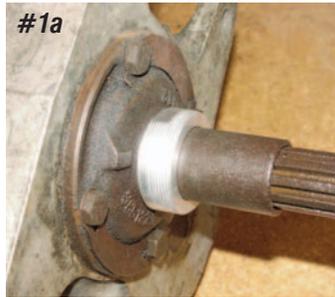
& 1b: The old universal style release bearing fit onto the stock front bearing retainer. It used an adjustable collar that screwed into the bearing. This collar was used for setting the bearing to pressure plate clearance.
